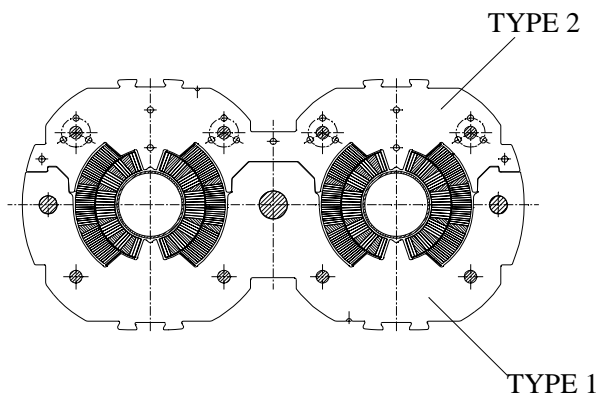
Collared coil assembly straight part cross-section: type 1 and type 2 collars mounted on coils are shown.
